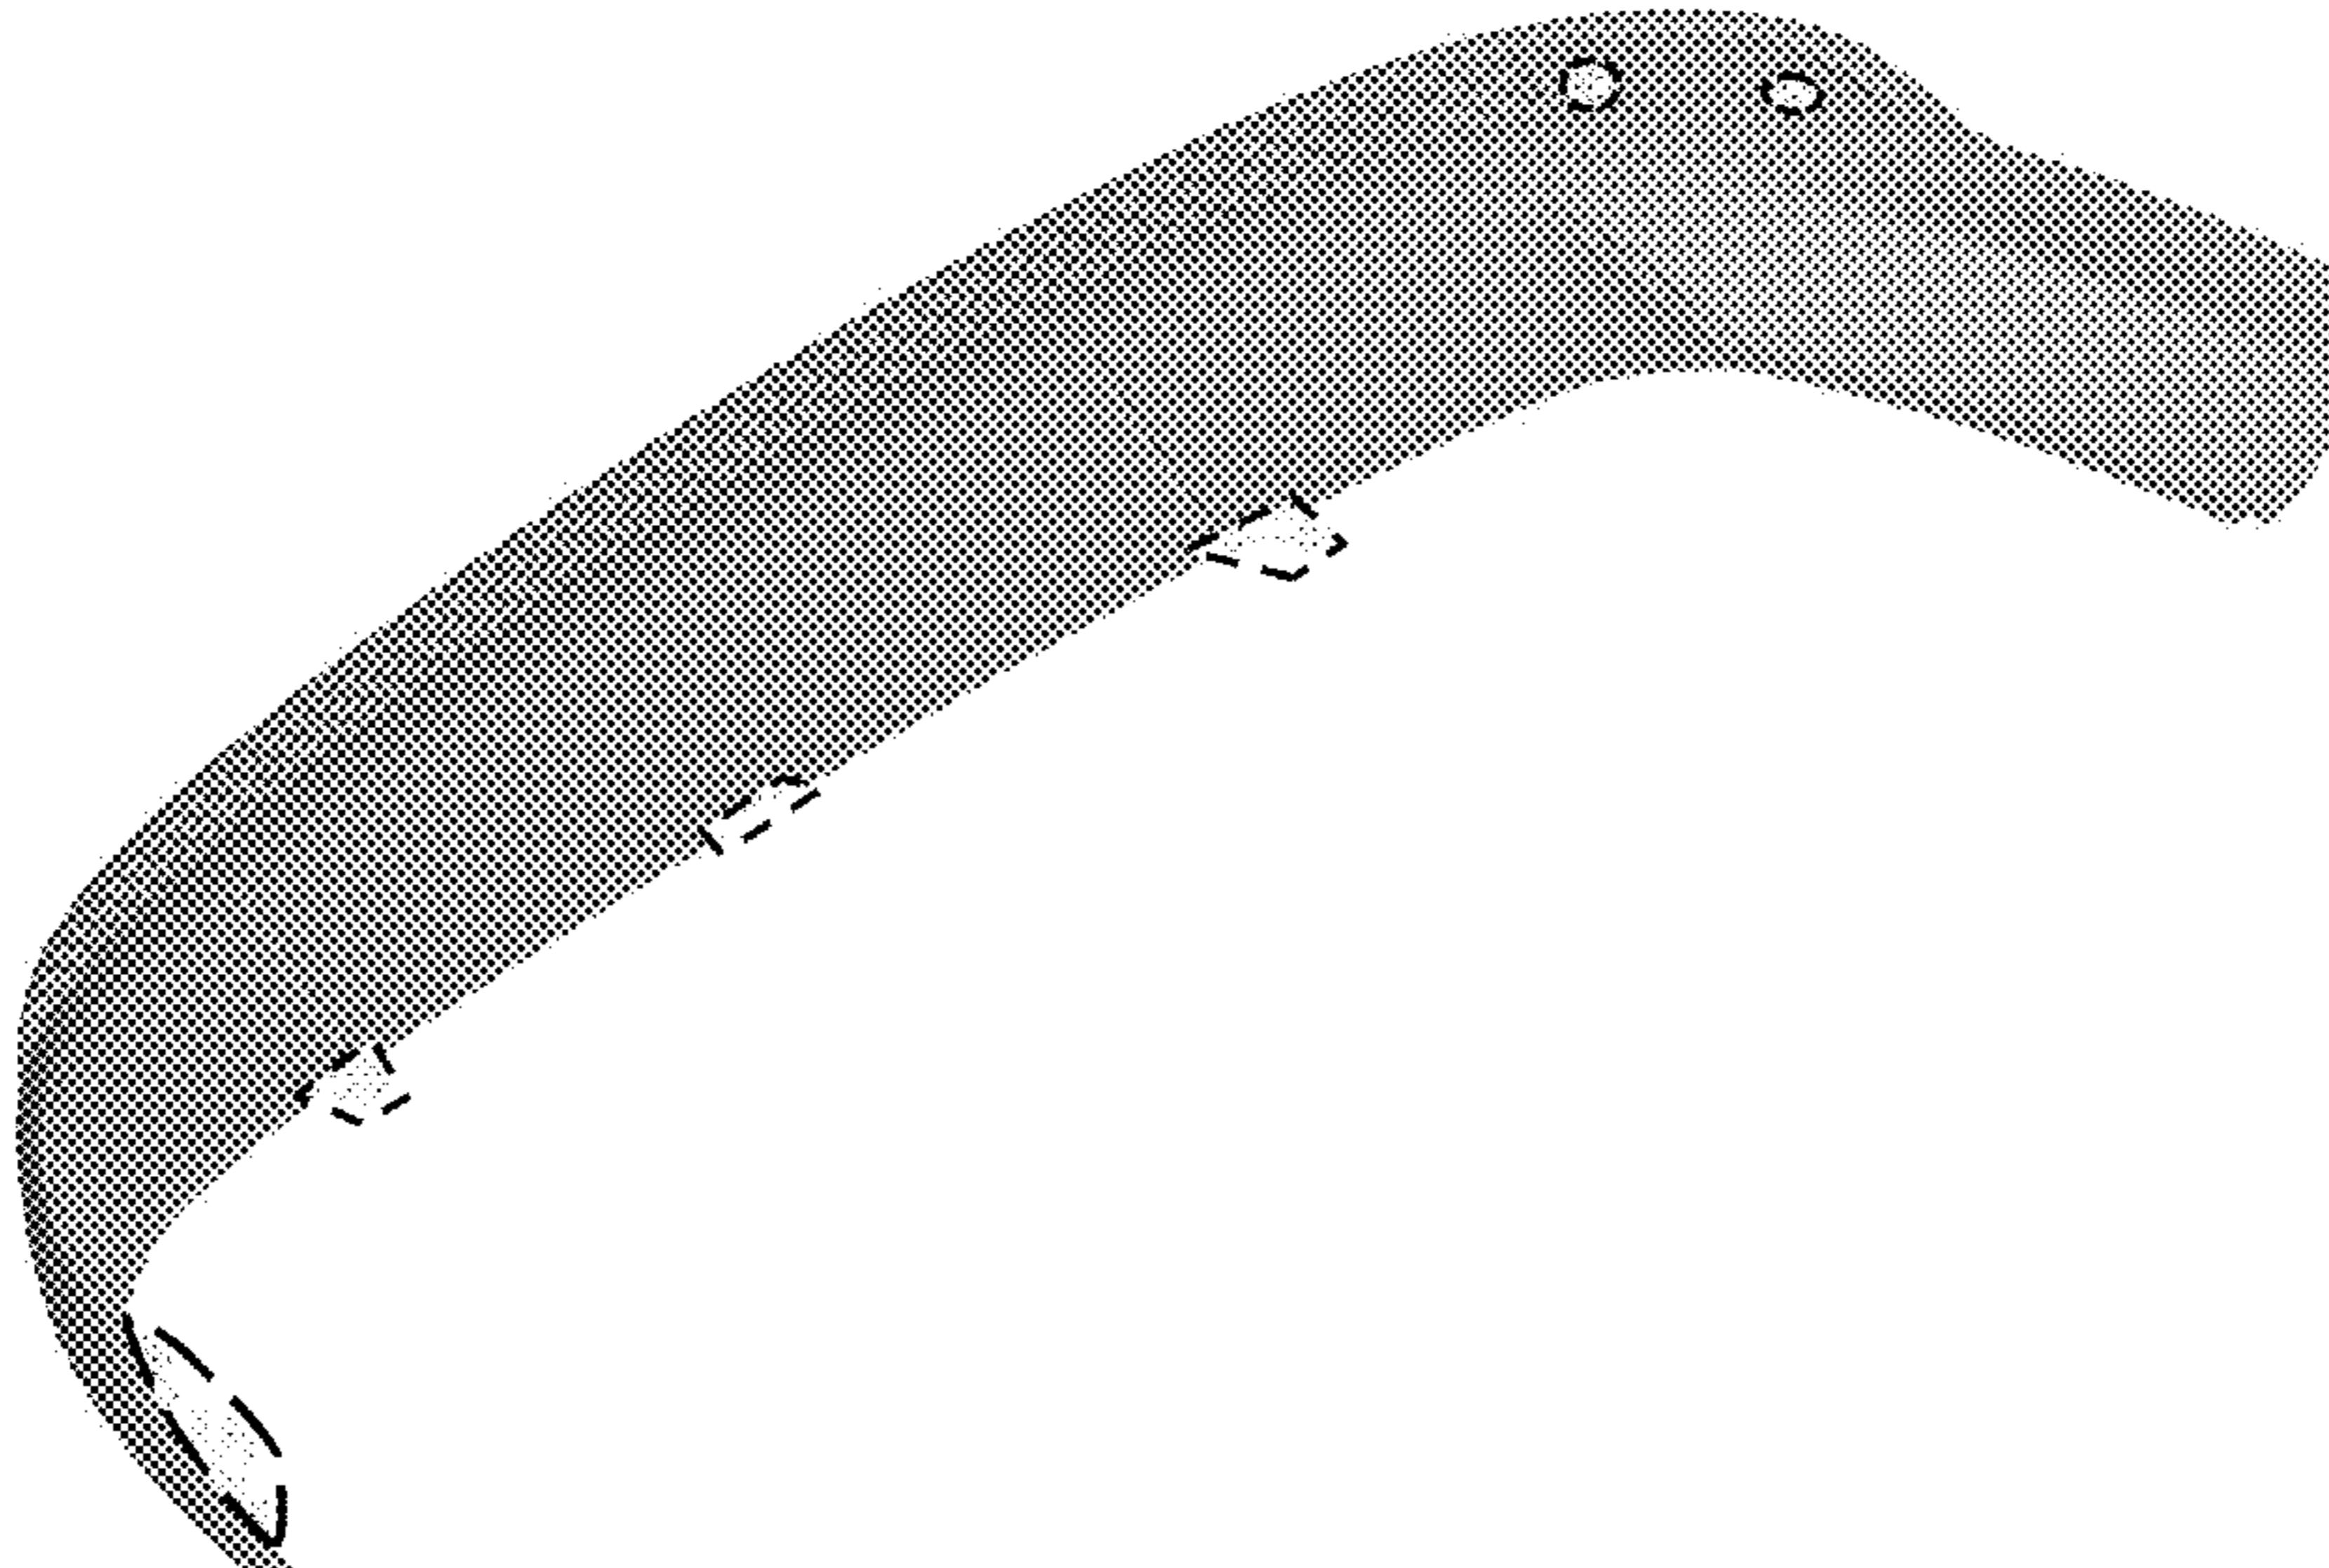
is a left side elevational view of the vehicle rear lower bumper cover;
